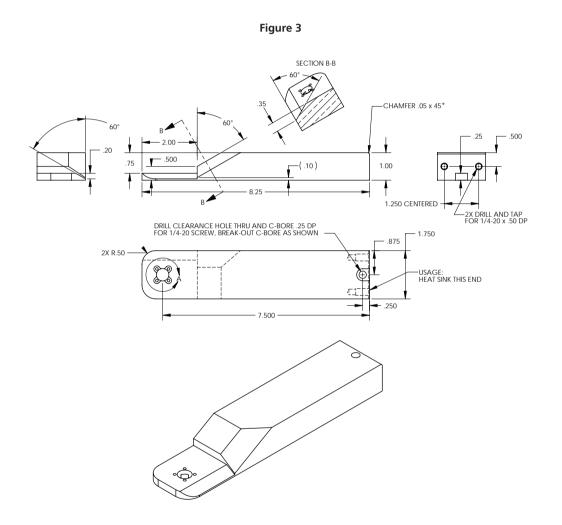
is drawing number 9506 and shows the heat sink we use during spot photo measurements of the X-ray spot size. The bar is hard mounted to a base which is fastened to an optical table. This bar then provides a fixed datum plane for subsequent measurements. A 150 CFM fan blows continuously on this bar and the front of the unit. To allow for thermal expansion of the unit, the rest of the source rests on two plastic cradles which are NOT clamped to the unit but still support a majority of the weight of the unit.
